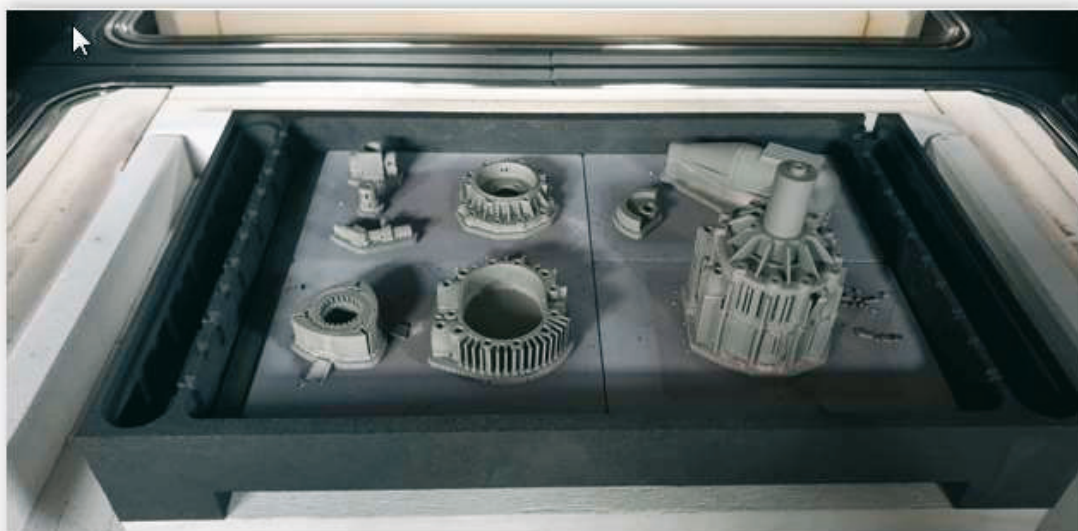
The 3D printed Wankel engine assembly and separate printed parts
